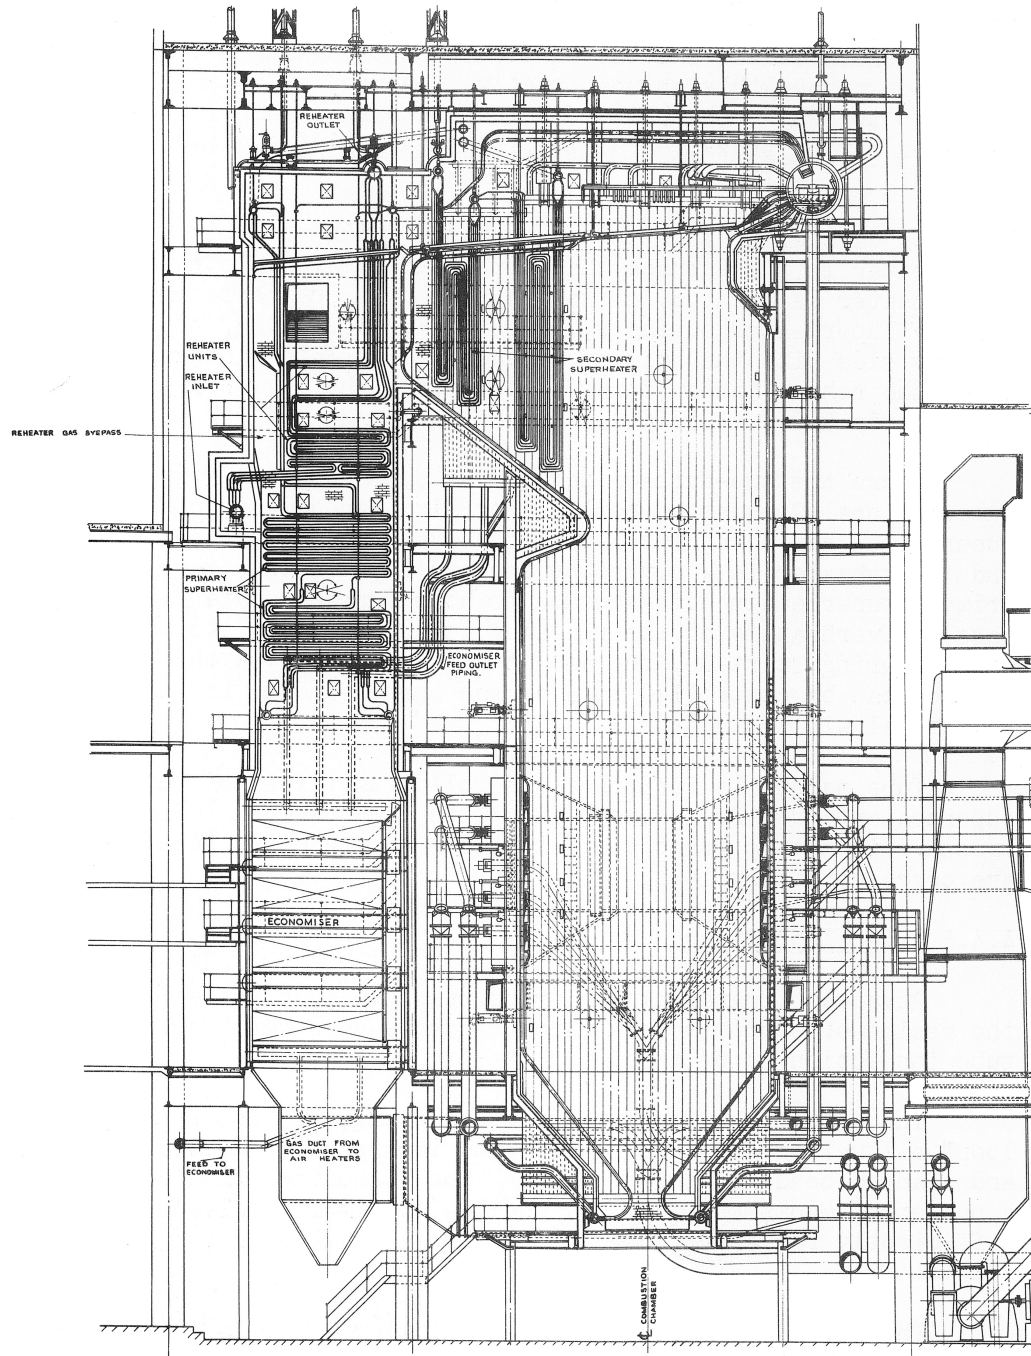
EXAMPLE OF REHEATER LOCATION BETWEEN SECONDARY AND PRIMARY SUPERHEATER SECTIONS.
